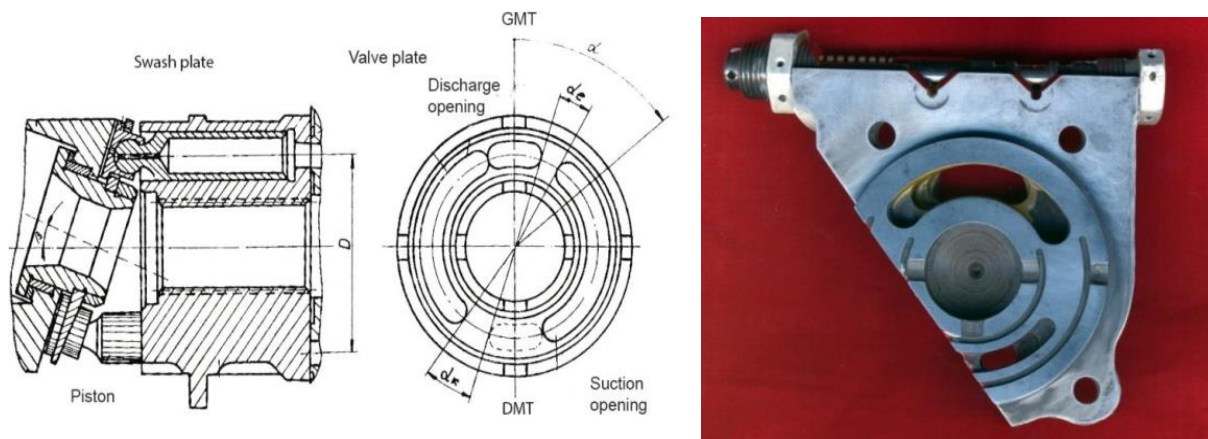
axial piston pump with swash plate, b) detail of valve port plate
